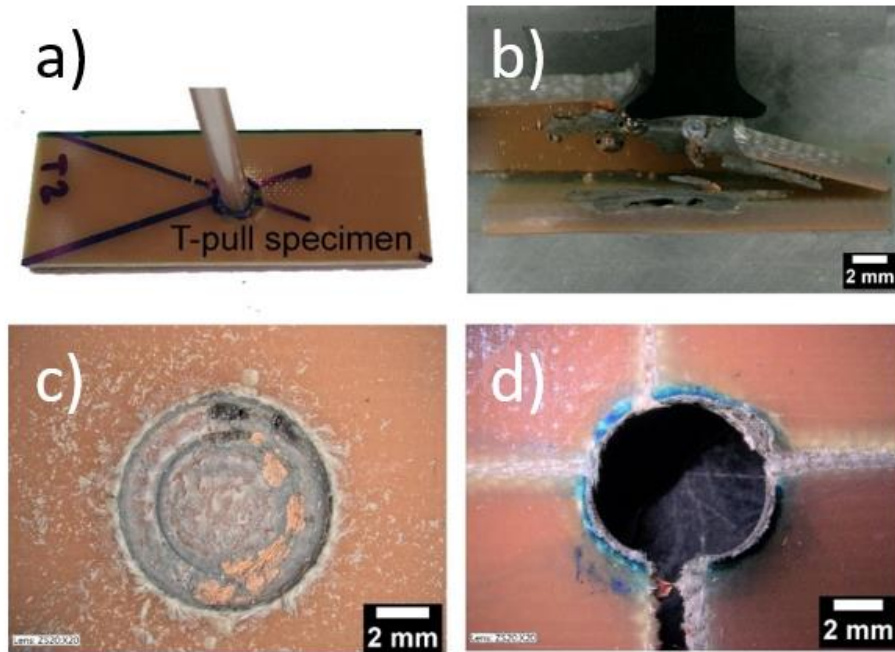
a) T-pull specimen before testing, b) cross-sectional view of failure through PCB plate, (c) lower and (d) upper FR4-PCB parts after T-pull testing.
